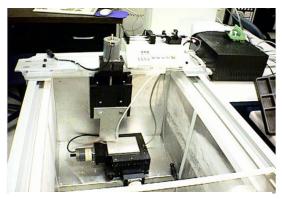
Rapid Freeze Prototyping (RFP) Machine [4-5].
